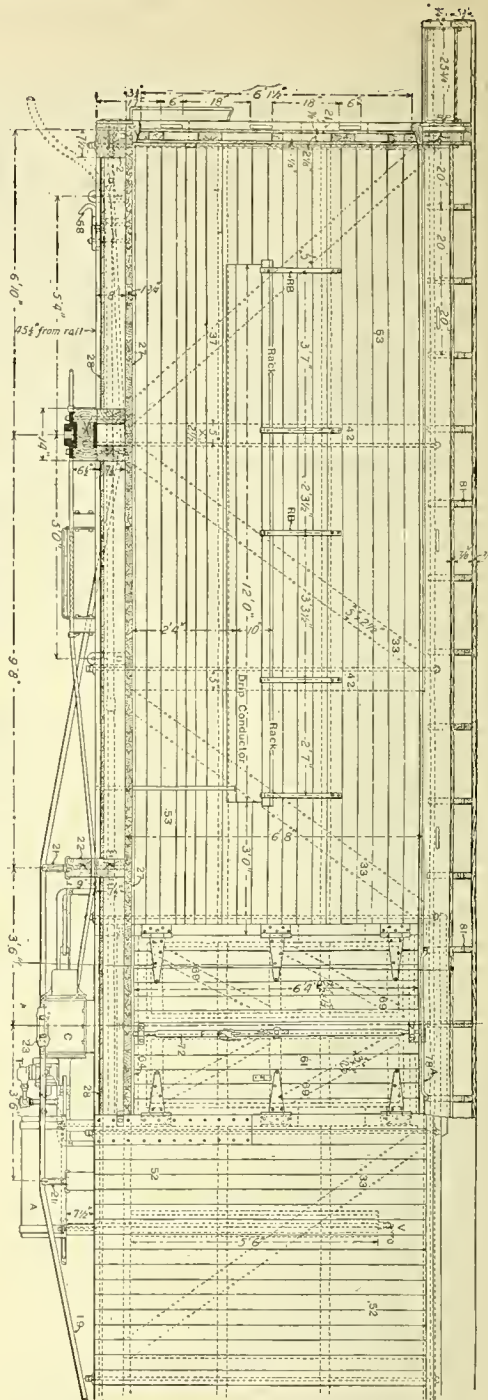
Half Longitudinal Section and Part Side Elevation.
